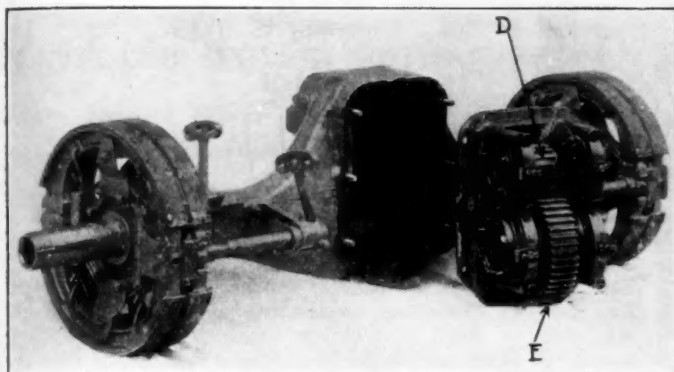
A DOUBLE-REDUCTION REAR-AXLE IN WHICH THE FIRST REDUCTION IS BY BEVEL GEARS AND THE SECOND BY SPUR GEARS
